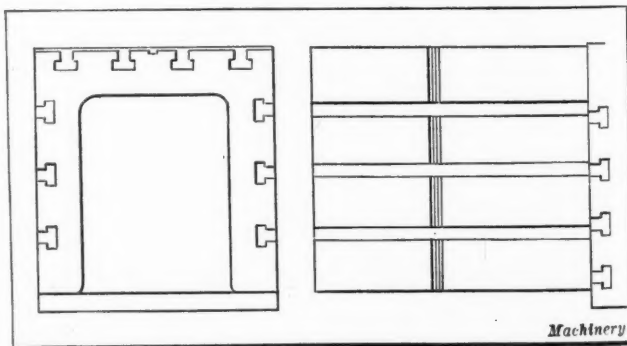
Simple Form of Box Table used on Shapers, provided with Special Grooves for holding Cylindrical Parts
